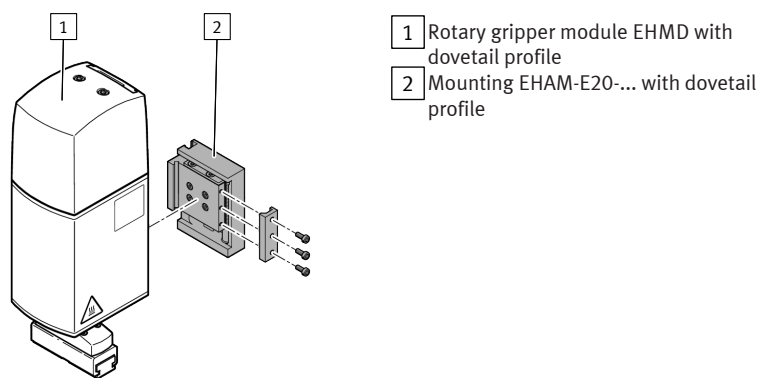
Dovetail mount, example mounting EHAM-E20-40-Z
